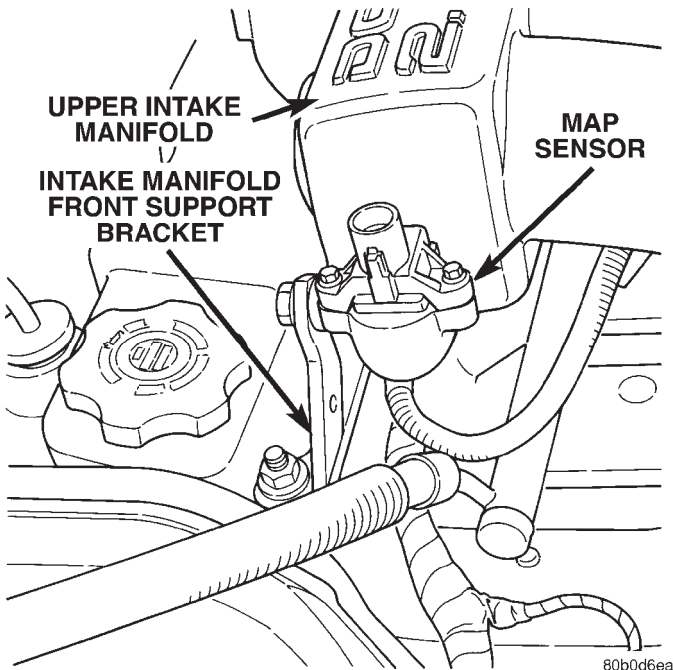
Intake Manifold Front Support Bracket and Map Sensor
